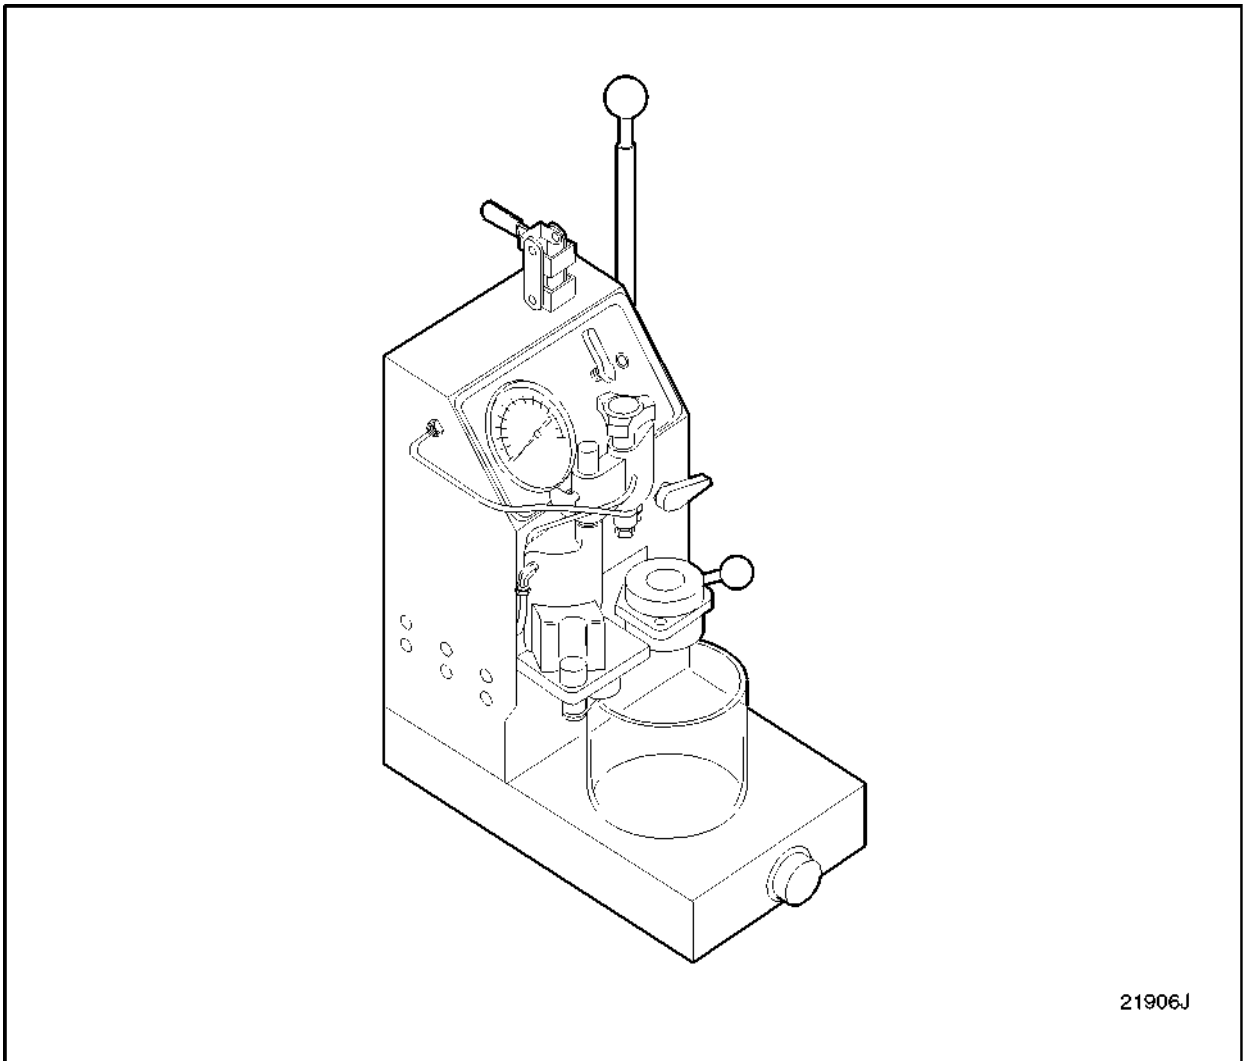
Injector Pop Fixture J 34760-B Includes: J 34760-147A and J 34760-150A
